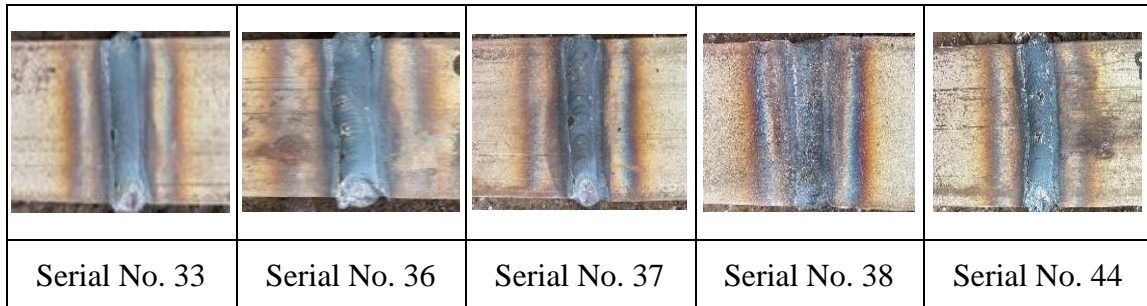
Top view of typical welded specimens of Experimental Set 4
